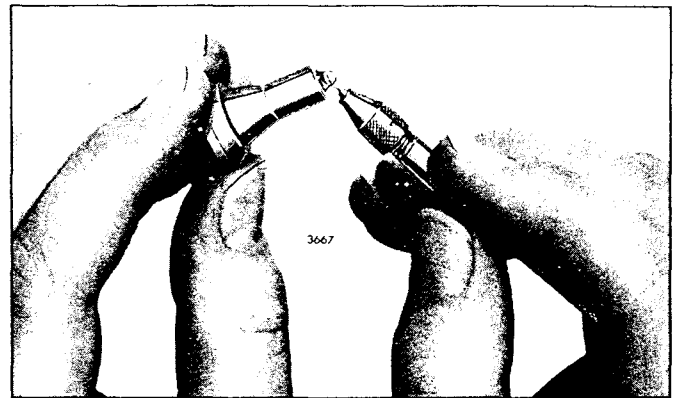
Cleaning Spray Tip Orifices with Tool J 4298-1
